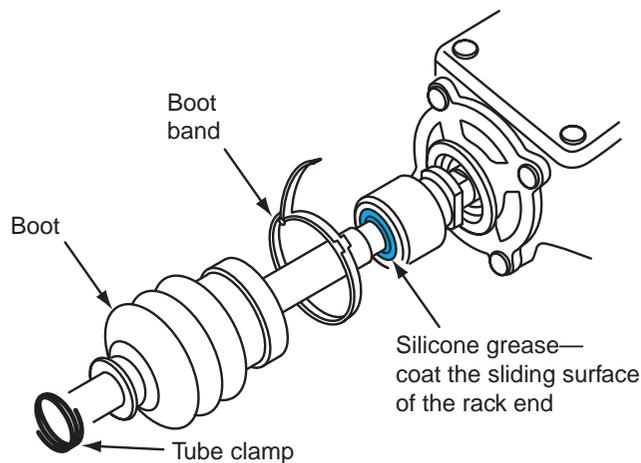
Lubrication of the inner tie-rod joint housing.
